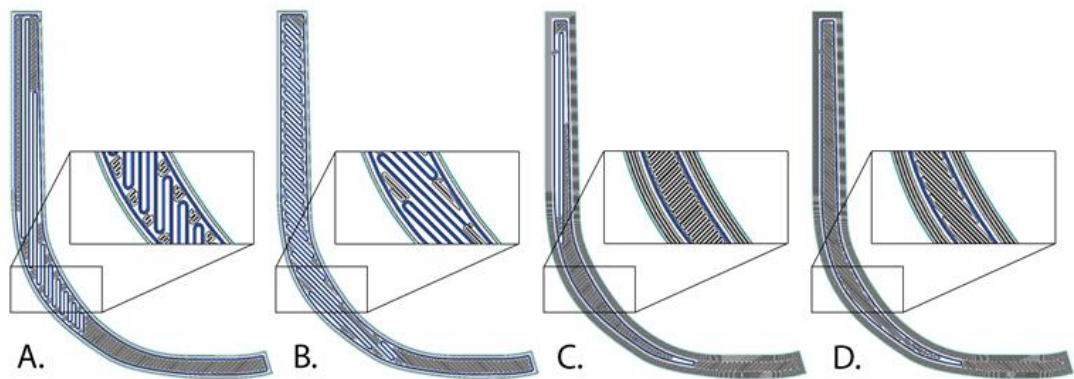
Wall Layers. (a) 1 Wall layer, Reinforcement 0°. (b) 1 Wall layer, reinforcement 45°. (c) 4 Wall layers, Reinforcement 0°. (d) 4 Wall layers, Reinforcement 45 °.
